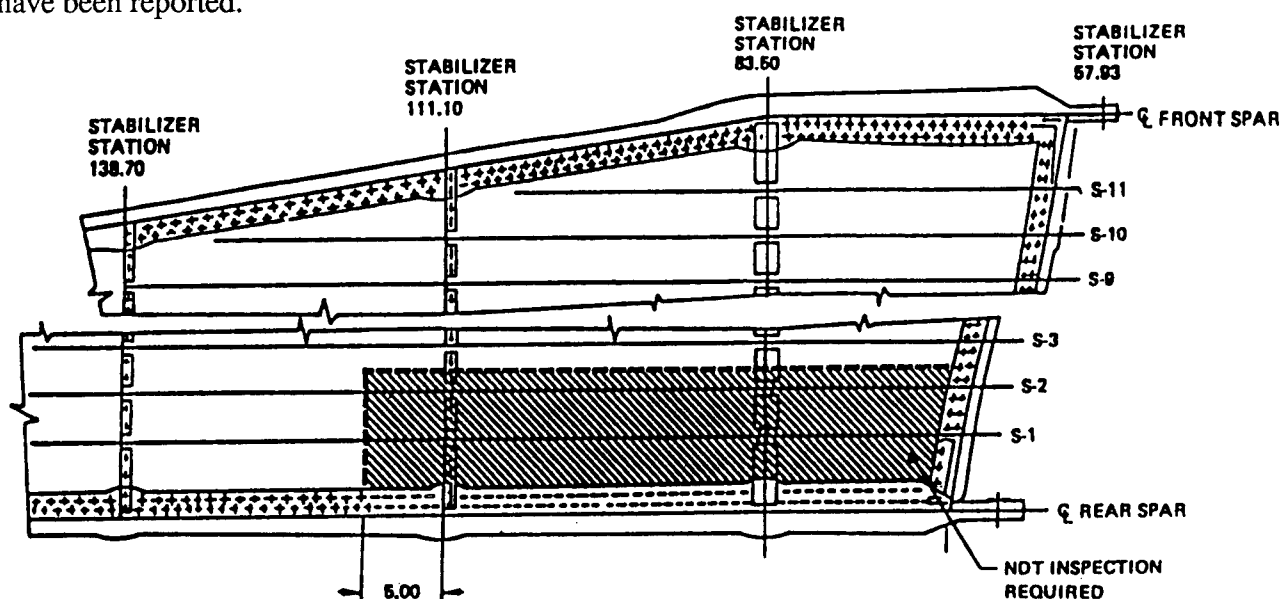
Upper and Lower Skin Panel NDT Inspection Requirements
